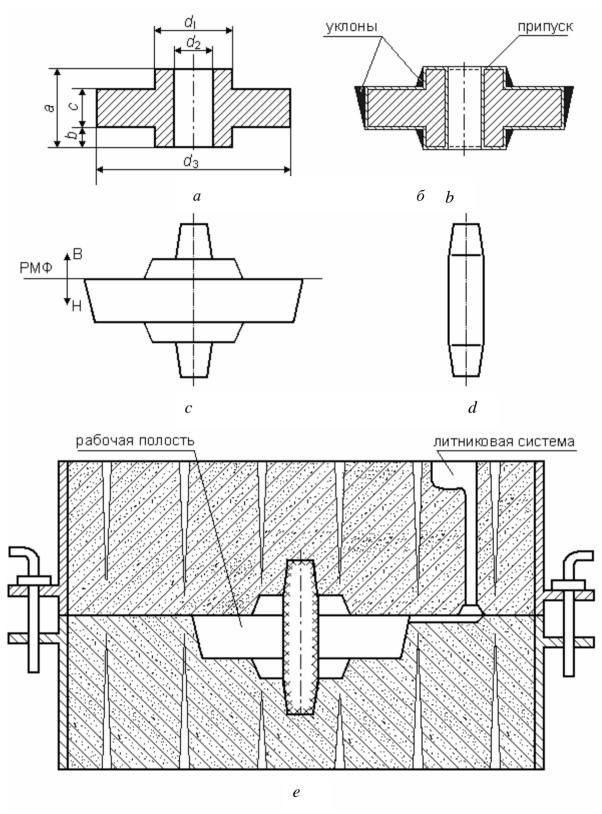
Example of task completion: *a)* drawing of a part; *b)* drawing of a casting; *c)* drawing of a pattern; *d)* drawing of a core; *e)* vertical section of casting mould
